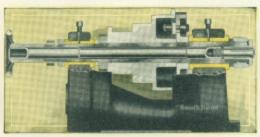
Cross Section View of Lathe Headstock Show-ing Application of Hand Wheel Draw-In Collet Chuck.
